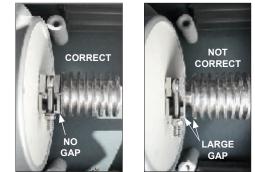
Lamp Tube Terminal Positioning in Clamp
